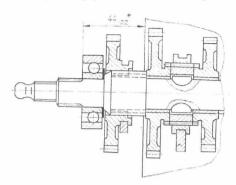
Installing the rear bearing of the secondary shaft * To gasket
